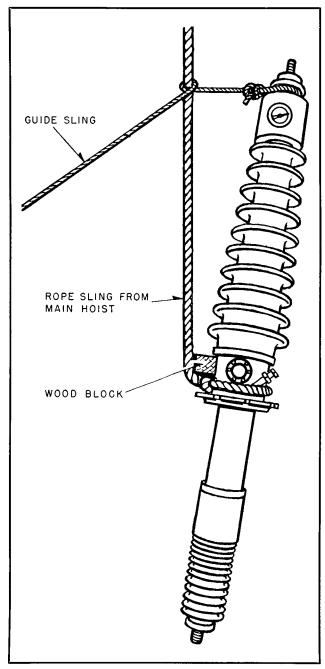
Method of Suspending a Condenser Bushing at Proper Angle for Inserting Into Tank Top
